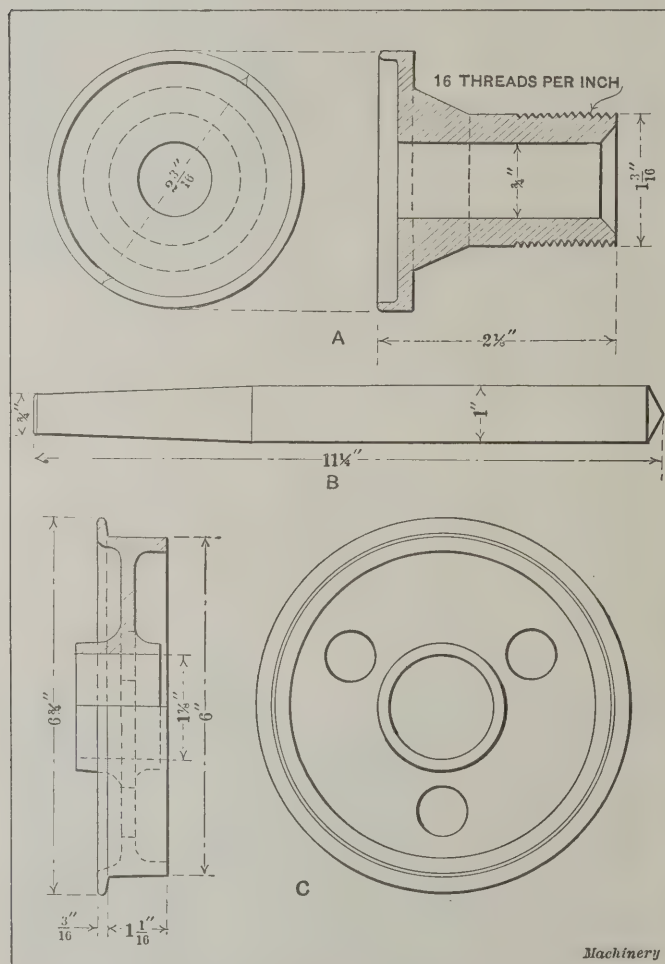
(A) Phosphor-bronze Bearing. (B) High-speed Steel Drill Blank (C) Cast-iron Flanged Wheel
